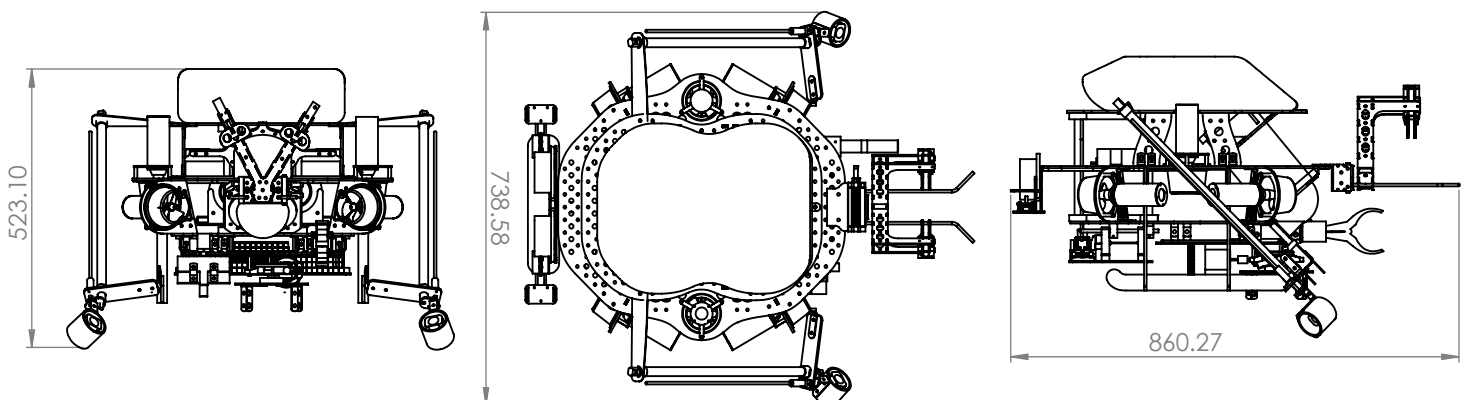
CAD drawing of the Stingray with Mission 2 manipulators (dimensions in mm)
